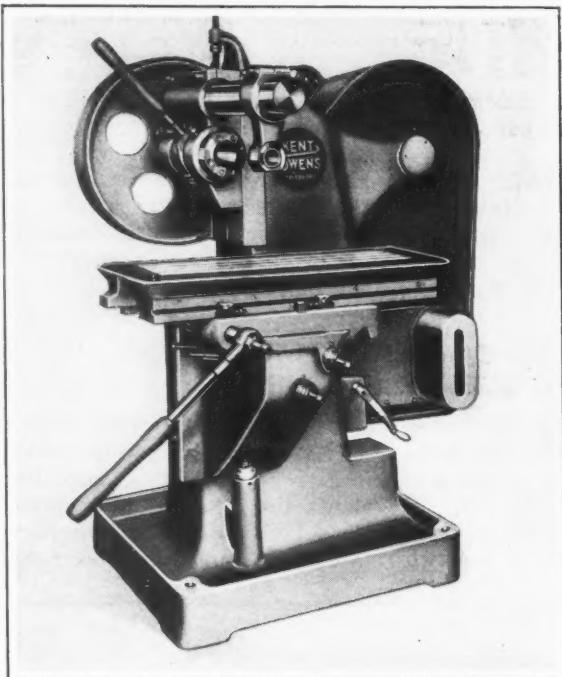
Kent-Owens Improved Milling Machine with Variable-speed Drive
